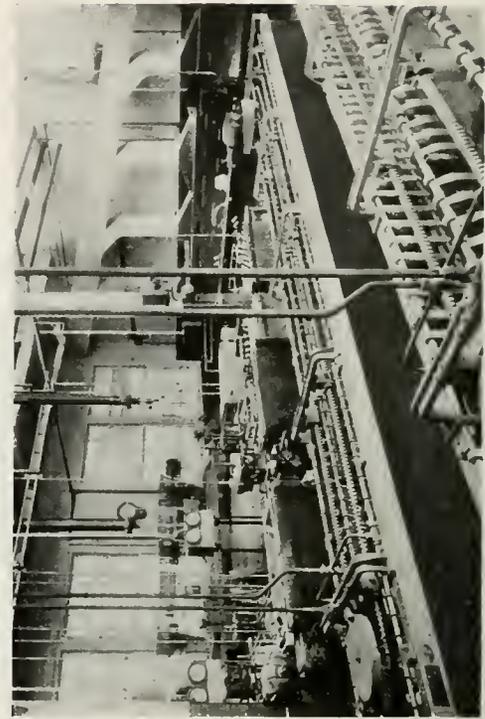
Portion of Electroplating Room showing Spiral Conveyor Plating Machines
